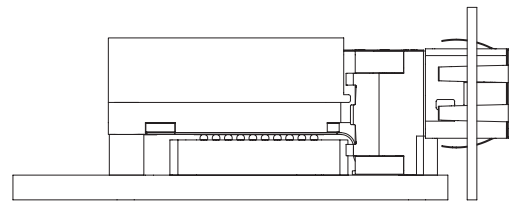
Package Outline for AFBR-732BEWZ and AFBR-742BEZ (dimensions in mm)
